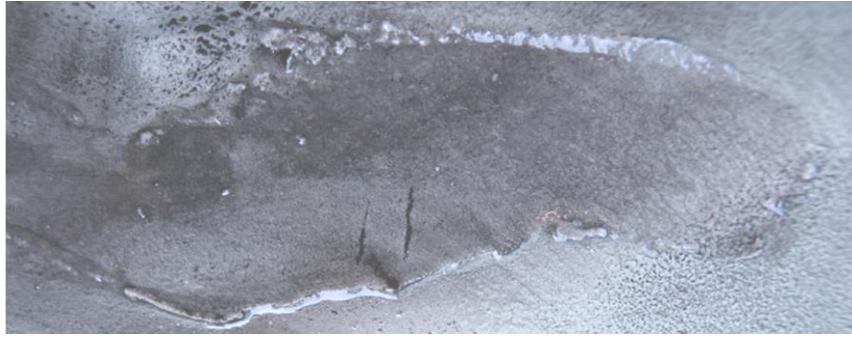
Crack in the print of damage BG3 from Pipe 1.
